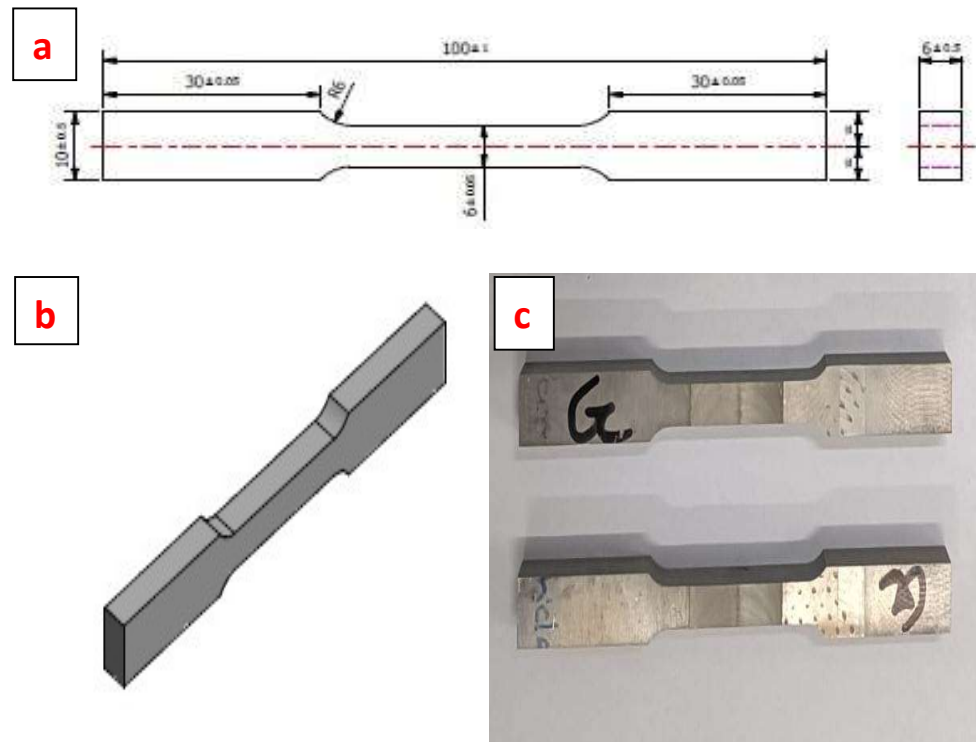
Tensile Specimen as per ASTM E8M standard (a) 2D detail Dimension (b) 3D View (C) original sample prepared after FSW welding followed by Wire Cut EDM
